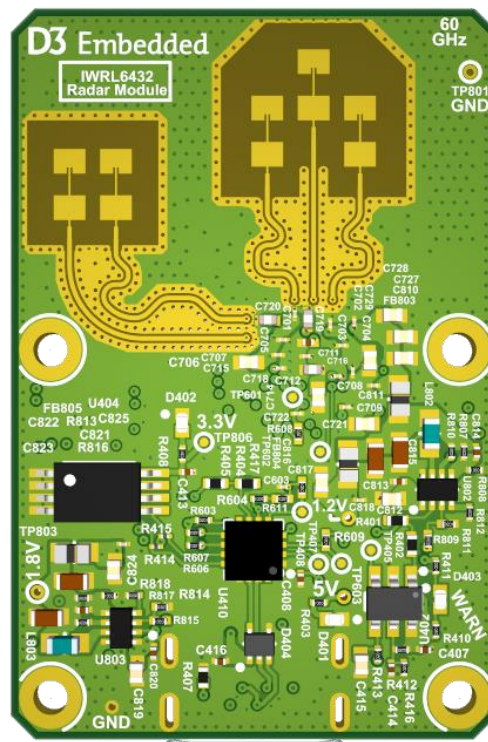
PCA-00C019044 or PCA-00C019049 PCB with Built-In Antenna
